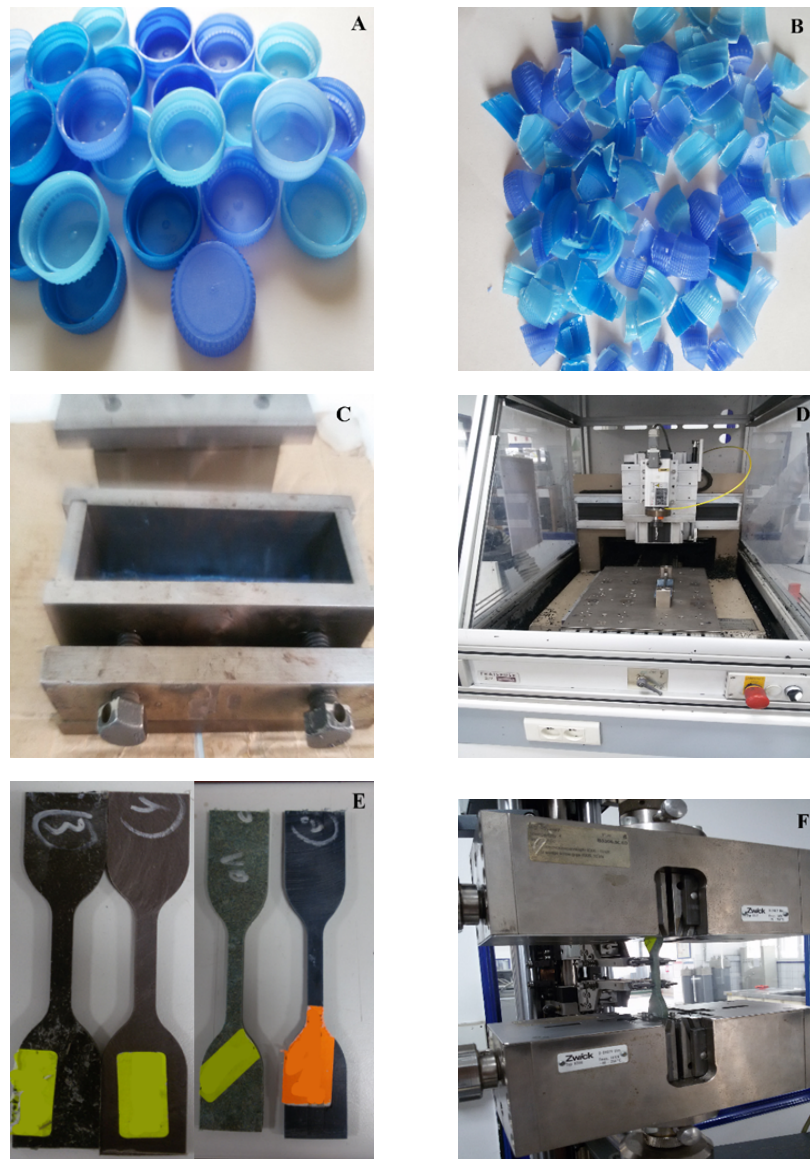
The processing steps of the Bio-composites. (A) Bottle caps waste. (B) Grinded bottle caps. (C) The molding step. (D) The machining of the platelets. (E) Samples of the produced bio-composites. (F) The tensile testing of samples.
